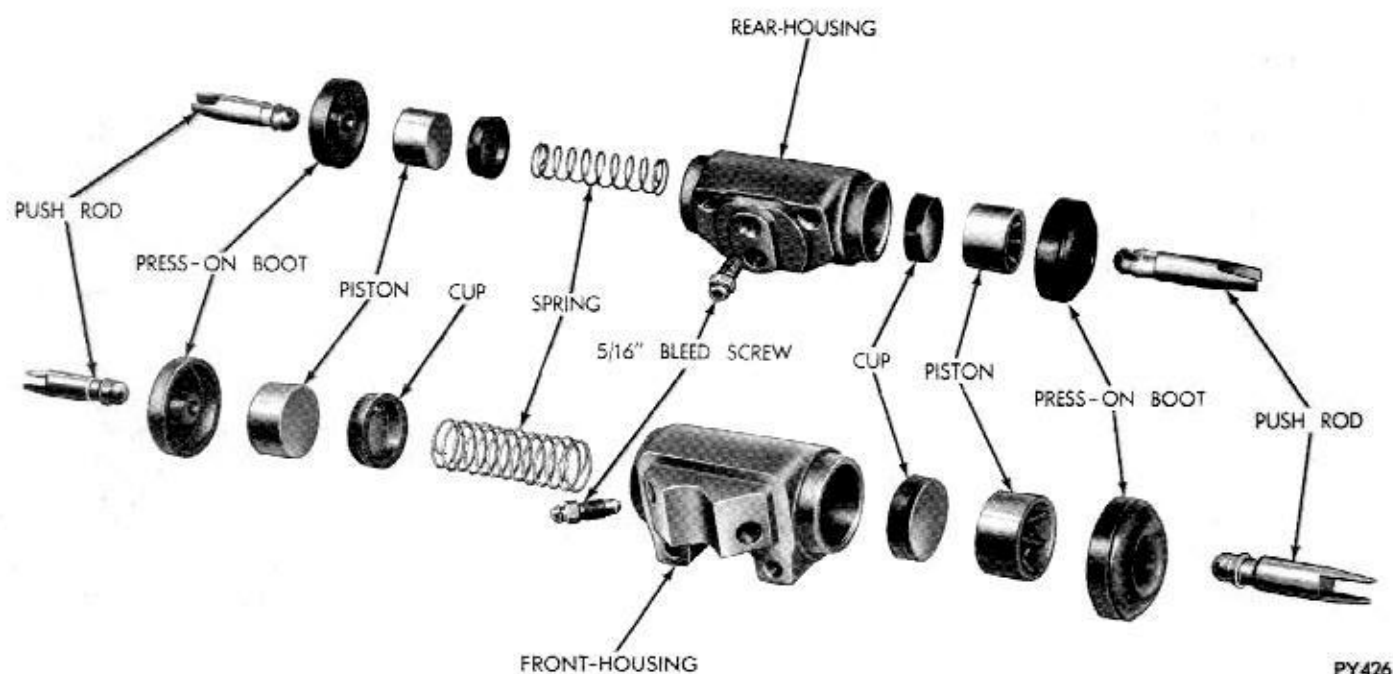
Wheel Cylinders 10 and 11 Inch Brake (Front and Rear)
